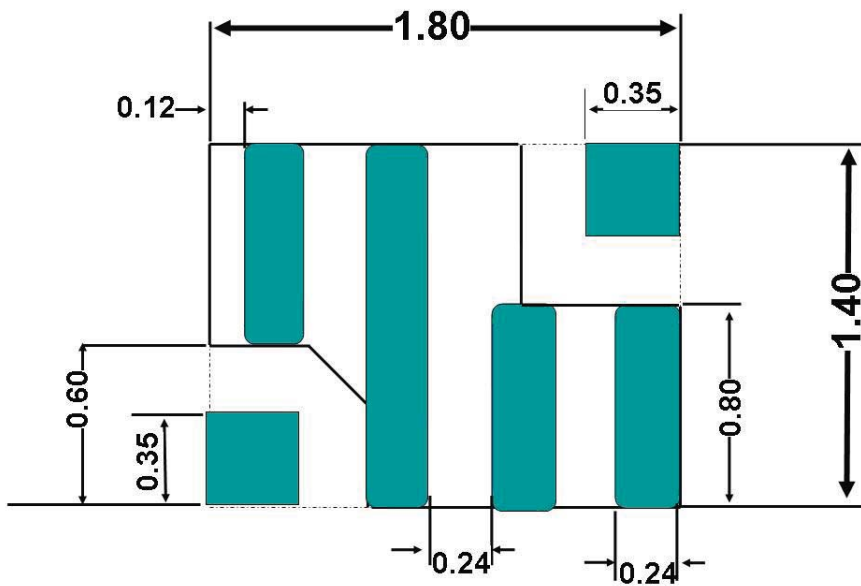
ACPF-7005 Superposed on PCB Layout (top view)
